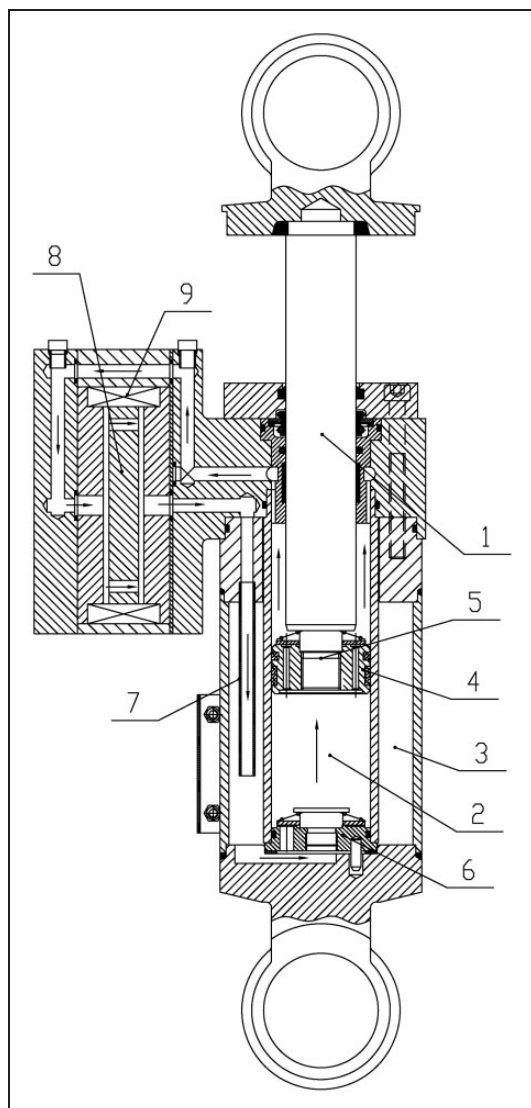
Schematic diagram of the twin-tube and bypass MR damper: (1) piston rod; (2) inner reservoir; (3) outer reservoir; (4) piston valve; (5) piston; (6) foot valve; (7) connecting tube; (8) MR valve; (9) coil.
